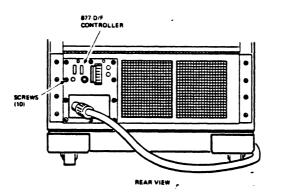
POWER CONTROLLER REMOVAL - REAR VIEW
